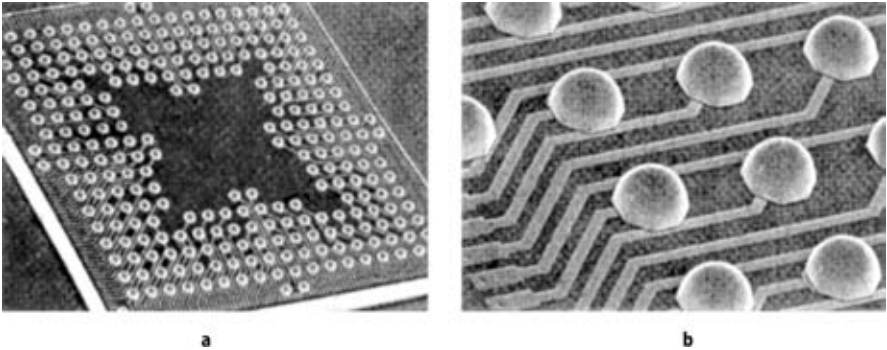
A micro-BGA with 275 pads 0.5 mm pitch (Treece, mini Ball Grid Array (mBGA) Assembly on MCM-L Boards in Electronic Components and Technology Conference, © IEEE 1994. Used by permission.)
